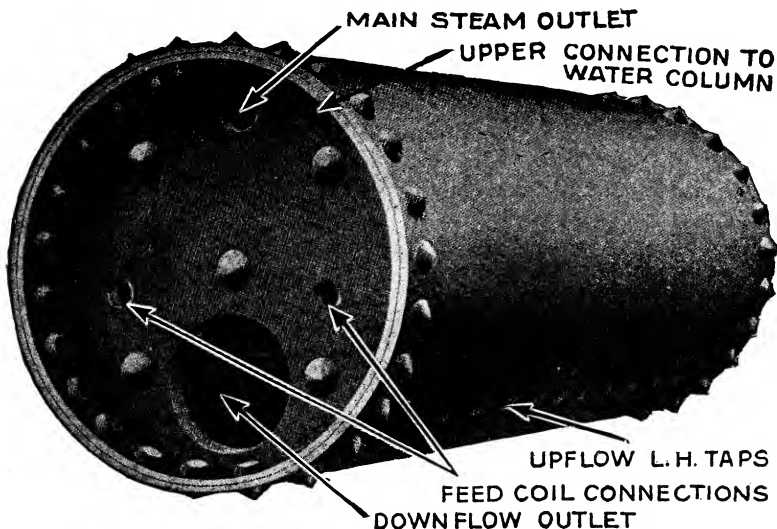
,860.—*Roberts water tube boiler construction: 1, steam drum.* The drum is constructed of open hearth steel and the heads riveted in and reinforced by through braces, as shown. The upper small hole is the top connection for the water column and the lower ones connect to the feed coils.
